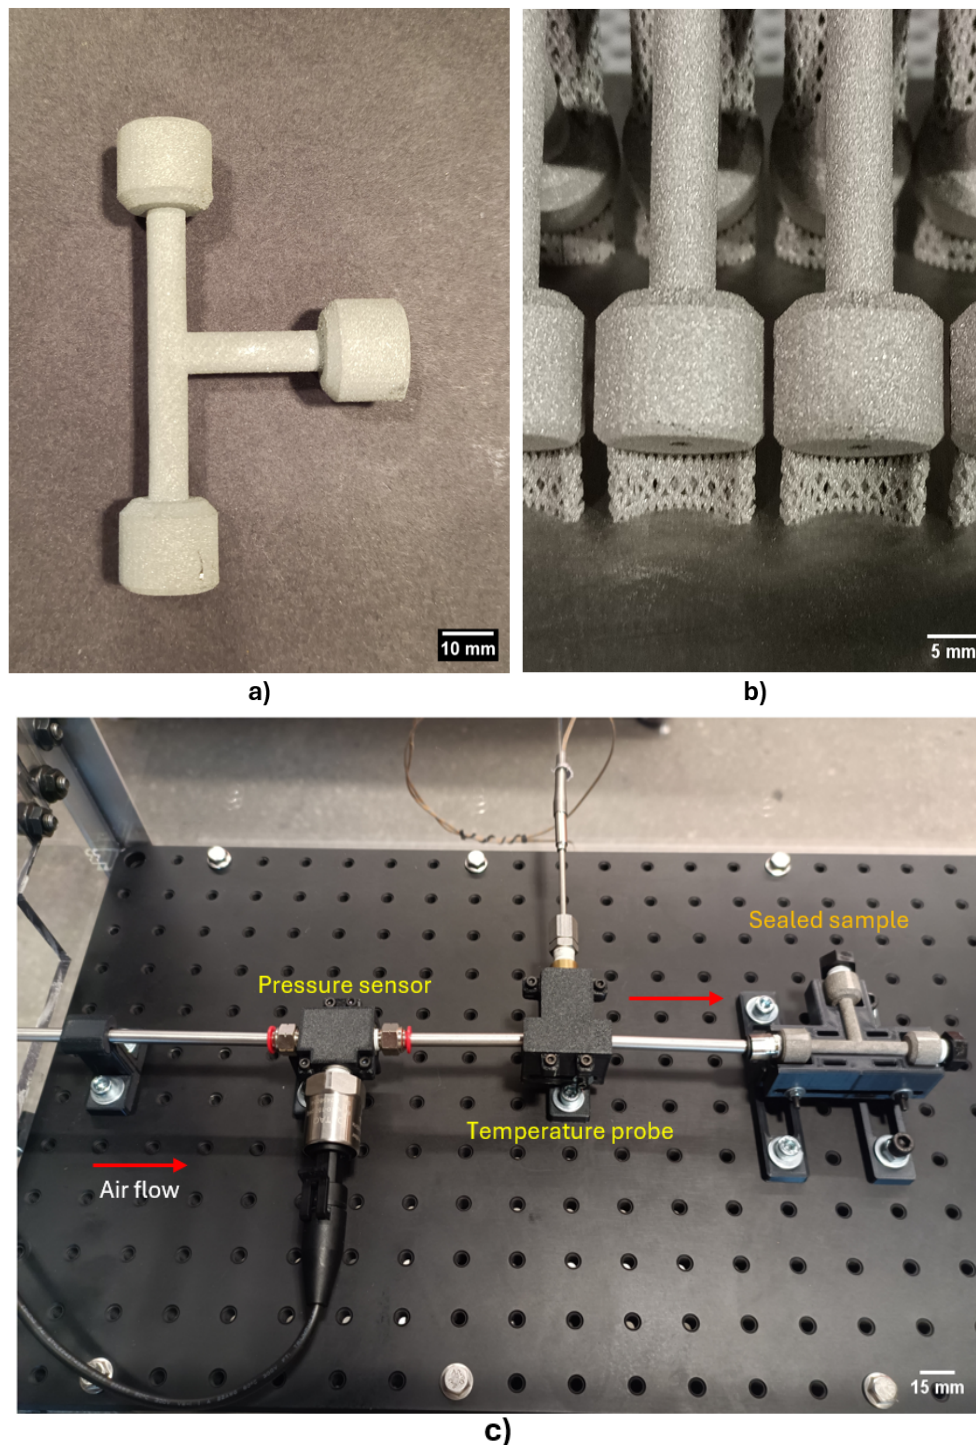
Printed parts and experimental set-up. (a) T-pipe sample without supports; (b) Sample batch of T-pipes; (c) Assembled pneumatic system to pressurize the samples.
